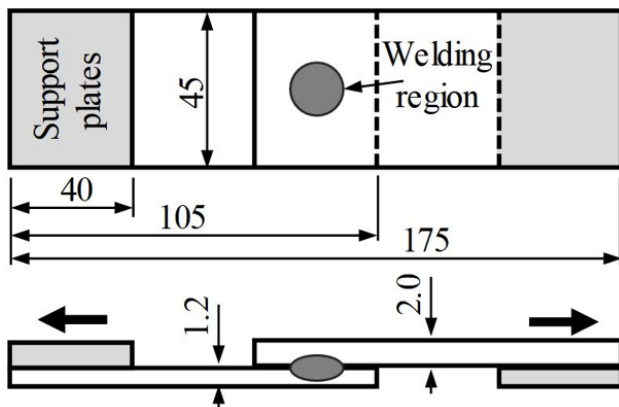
Geometry of the resistance spot welded specimens (All dimensions in mm).
